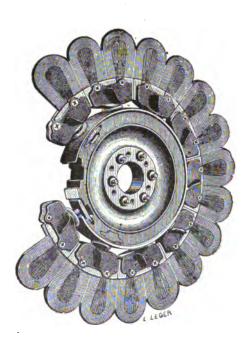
FERRANTI ARMATURE, SHOWING MODE OF MOUNTING COIL-HOLDERS.
